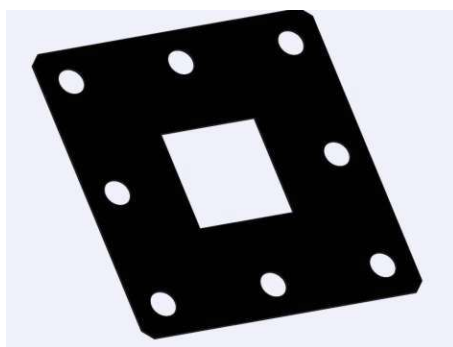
CAD Drawing of the gasket ensuring sealing between flowfield and membrane
